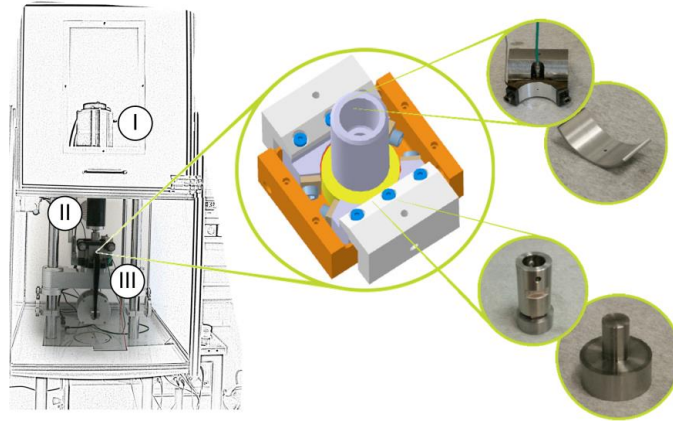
Test set up of the rotary tribometer TE92HS and the journal bearing adapter (JBA)
